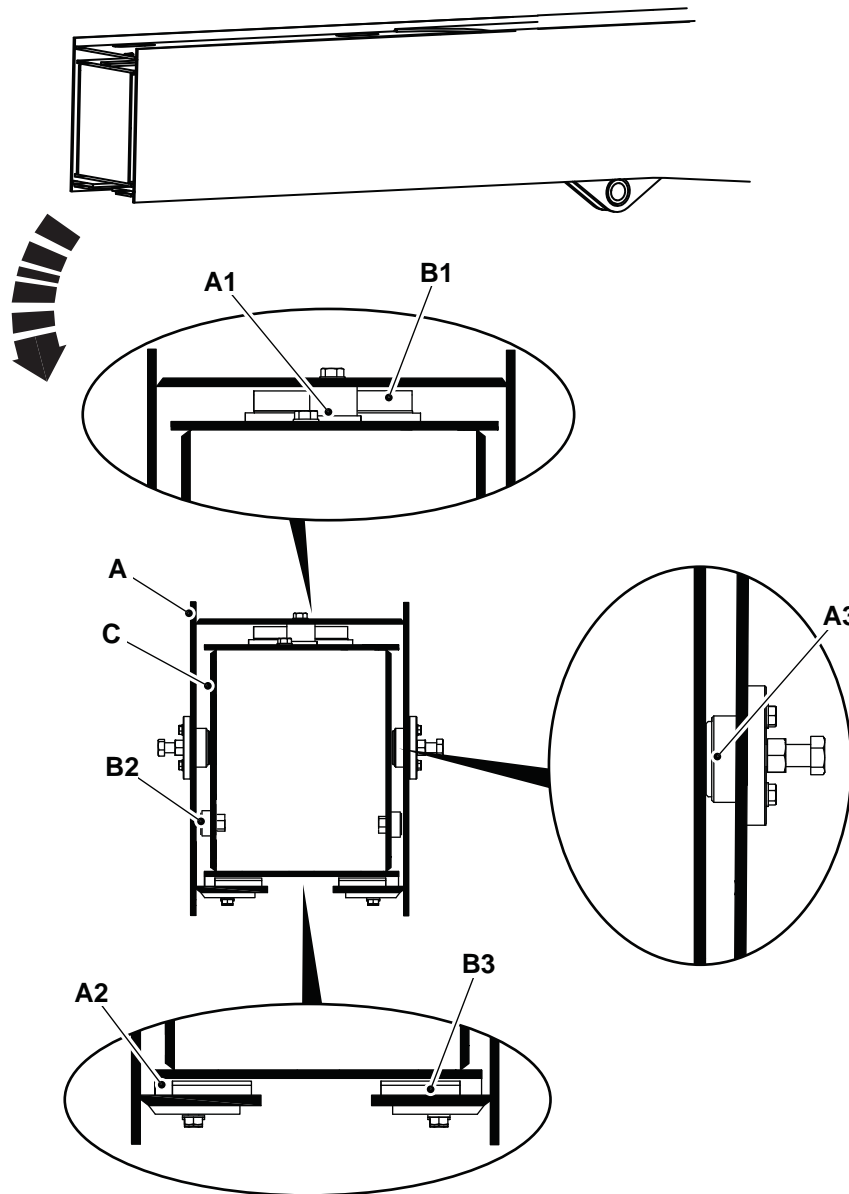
Standard Wear Pads Assembly Arrangement – Liftall 1202
